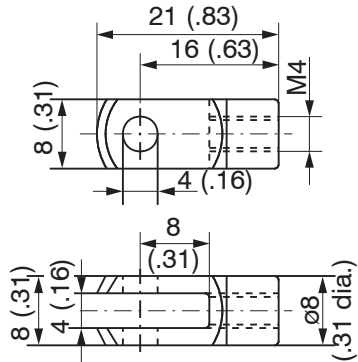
Attachment head GK1-WDS, dimensions in mm (inches)
